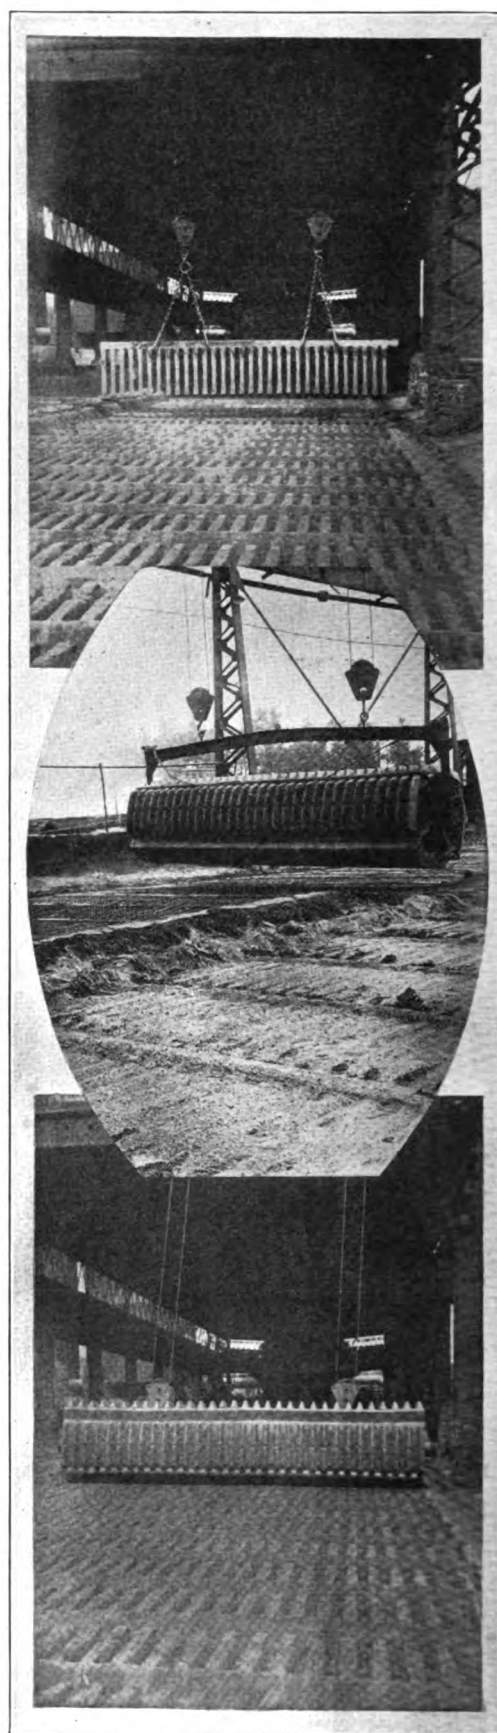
"Comb" or bed of pig iron made from bed moulder. Comb is en route to pig breaker. Center—View showing front and end of moulder. Lower—View showing character of moulding done with "roller." A very simple and most effective solution of the pig casting problem, which is typical of the methods developed by the Woodward organization.
